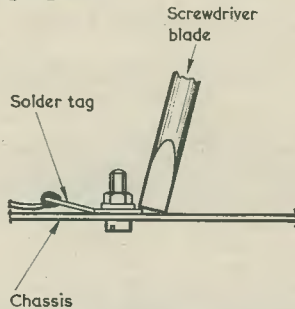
The presence of resistance between a solder tag and chassis can easily be located with the aid of a screwdriver
